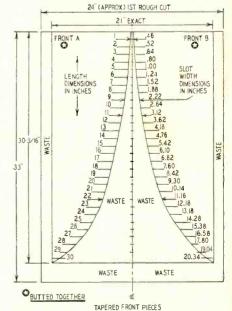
Dimensions for laying out the curve of the tapered front pieces.
